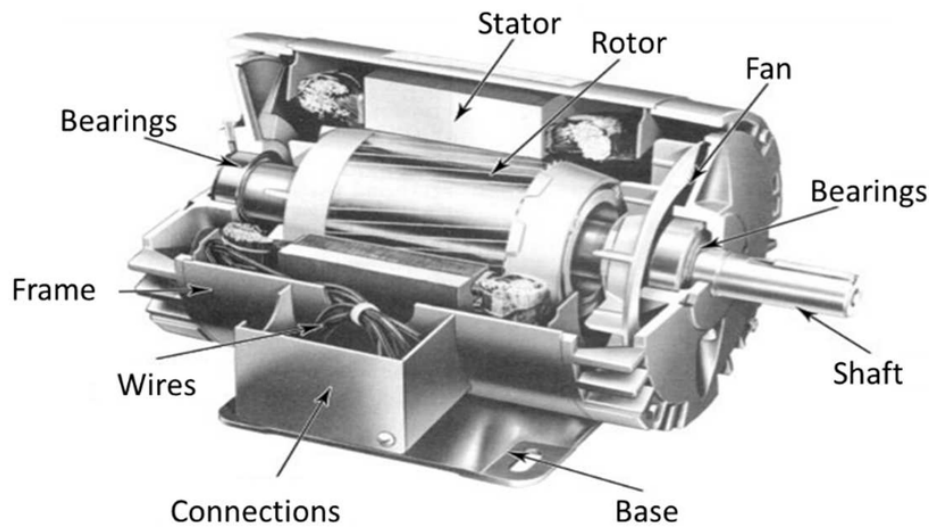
Generic cross-sectional view of a rotating electric machine illustrating the main mechanical components: stator, rotor, shaft, bearings, housing/frame, and internal wiring. Although shown here for an induction-type machine, the mechanical structure is representative of BLDC motors as well [9].
